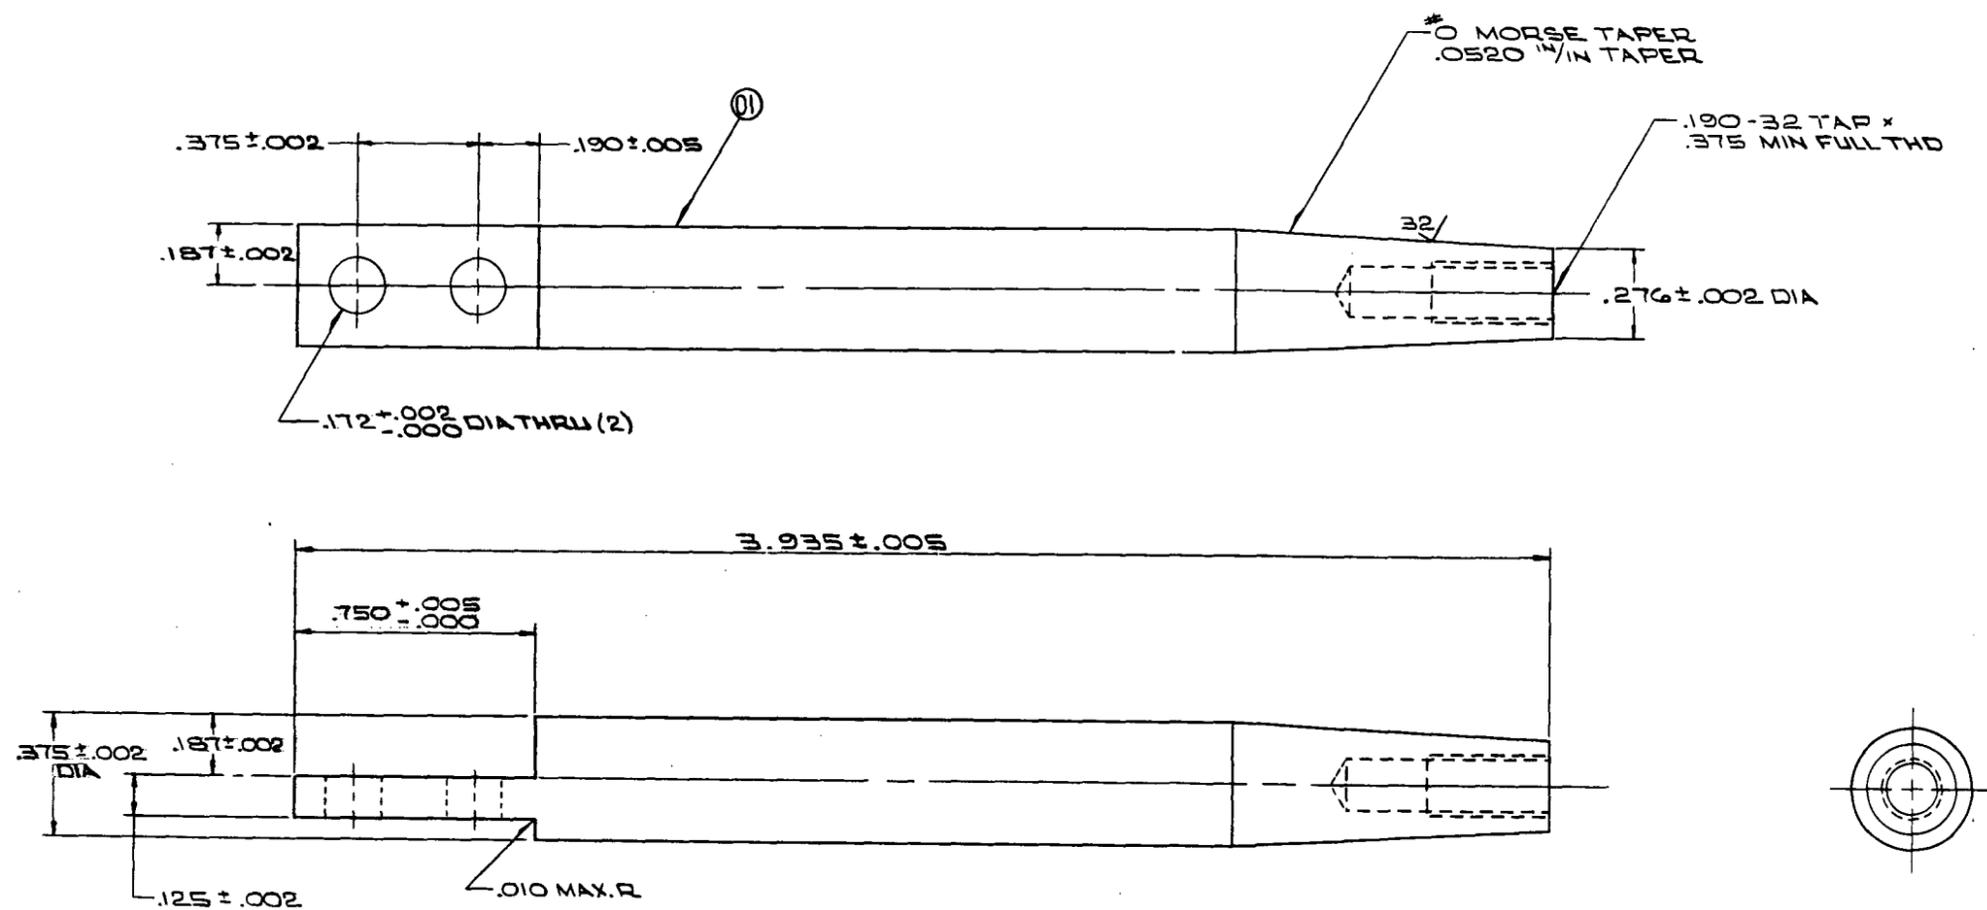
FLECHT SEASET Natural Circulation Single-Heater-Rod Terminal Assembly
